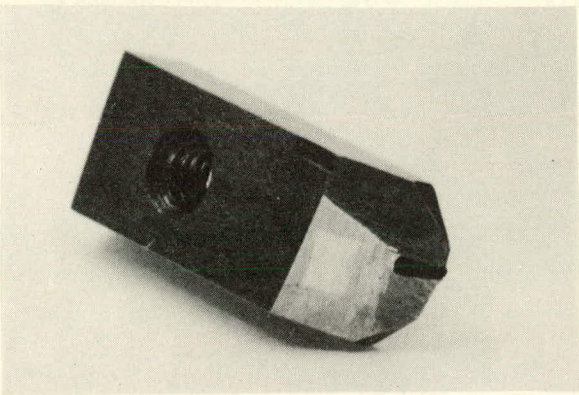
Photograph of Diamond Dresser and Grinding Wheel
